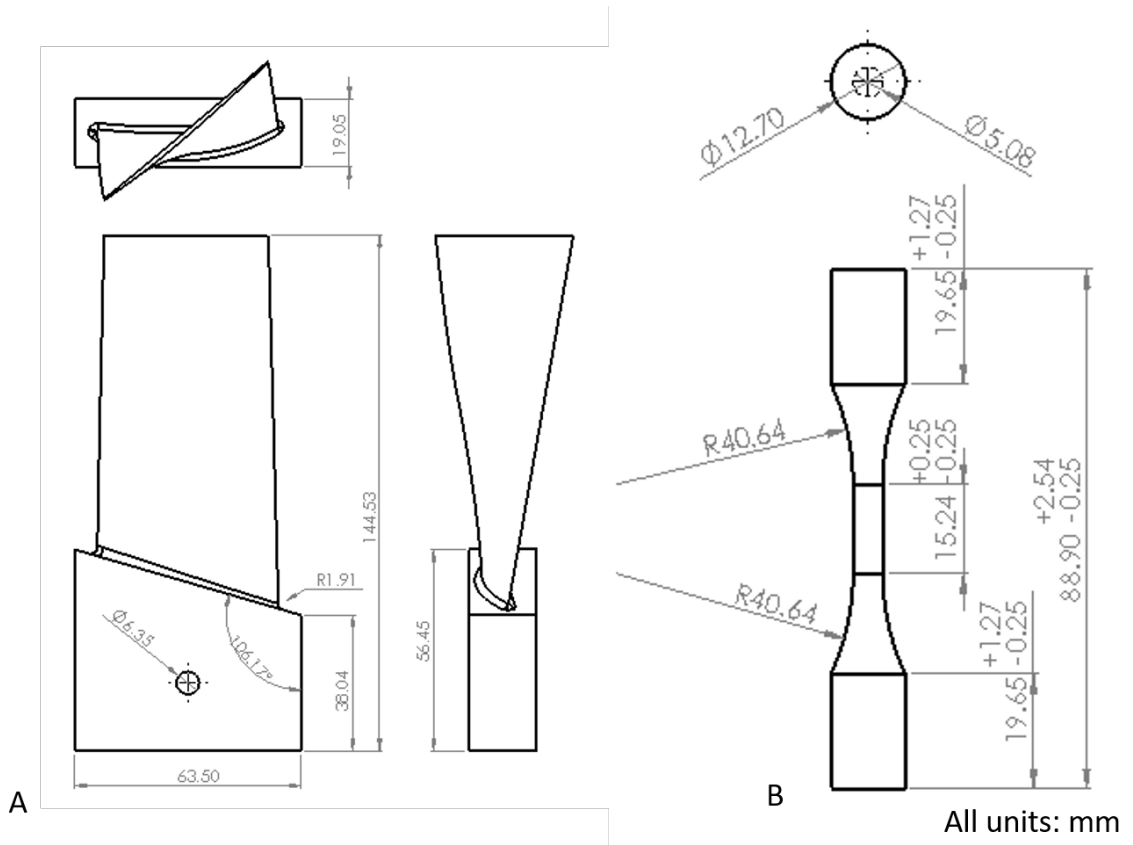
A) Turbine blade geometry. B) Fatigue bar geometry.
